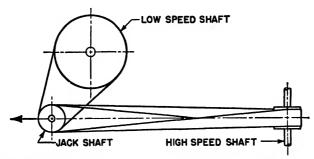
When speed ratios in a quarter-turn V-belt drive are greater than $2\frac{1}{2}$:1, the arrangement shown above should be used, because the shortest center distance possible with a straight quarter-turn drive would be too great. The drawing shows a conventional quarter-turn drive between the high-speed shaft and a jack shaft, and a straight multiple V-belt drive between the jack shaft and the slow-speed shaft. The jack shaft is movable for belt take-up.
